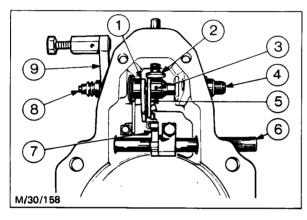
Stop Control and Excess Fuel Lever Assembly (Dorset)
